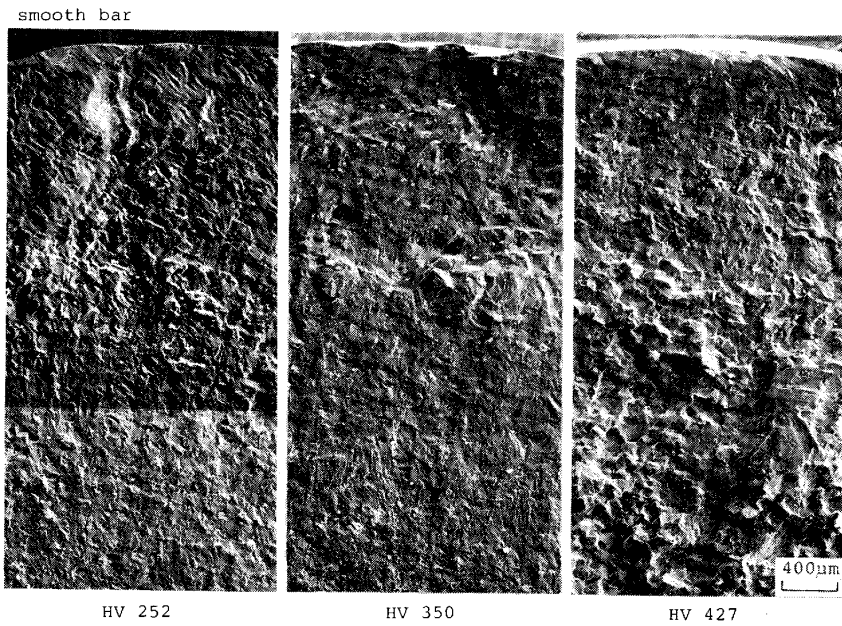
Scanning electron fractographs of fractured surface in fatigue tests.
